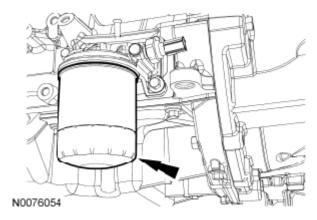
Locating Engine Oil Filter Courtesy of FORD MOTOR CO.
